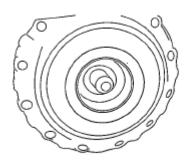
Identifying Transaxle Case Plate No.2 Bolt Courtesy of MAZDA MOTORS CORP.
